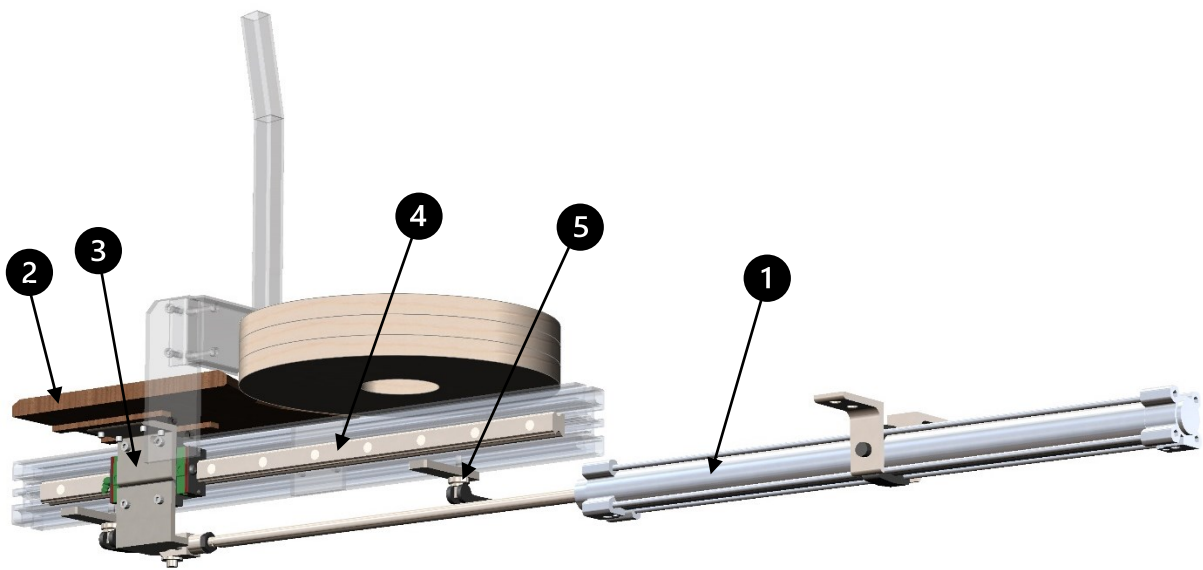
Disc pushing mechanism. (1) Pneumatic cylinder. (2) Pushing plate. (3) Brackets. (4) Linear guideway. (5) Stopper
